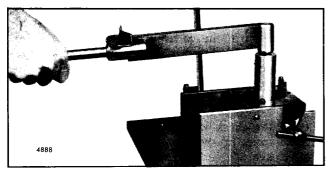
Tightening Injector Nut with Torque Wrench using Tool J 4983-01
